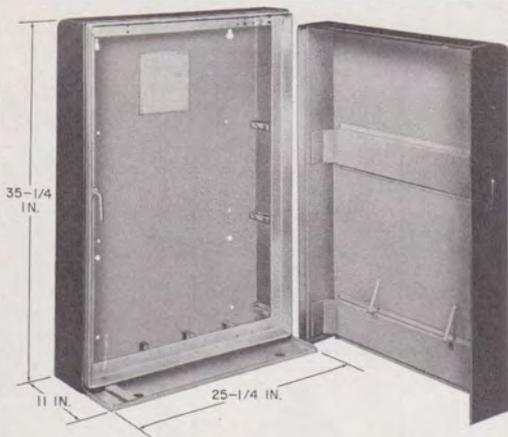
18-Plate Equipment Cabinet Per ED-91180-70
